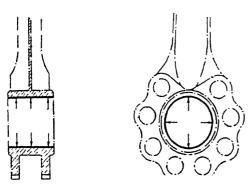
Showing points to check diameter of master connecting rod big end bore.
